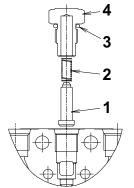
Check valve section (P3 Inlet, Travel, and Anti-drift Valve Sections)
